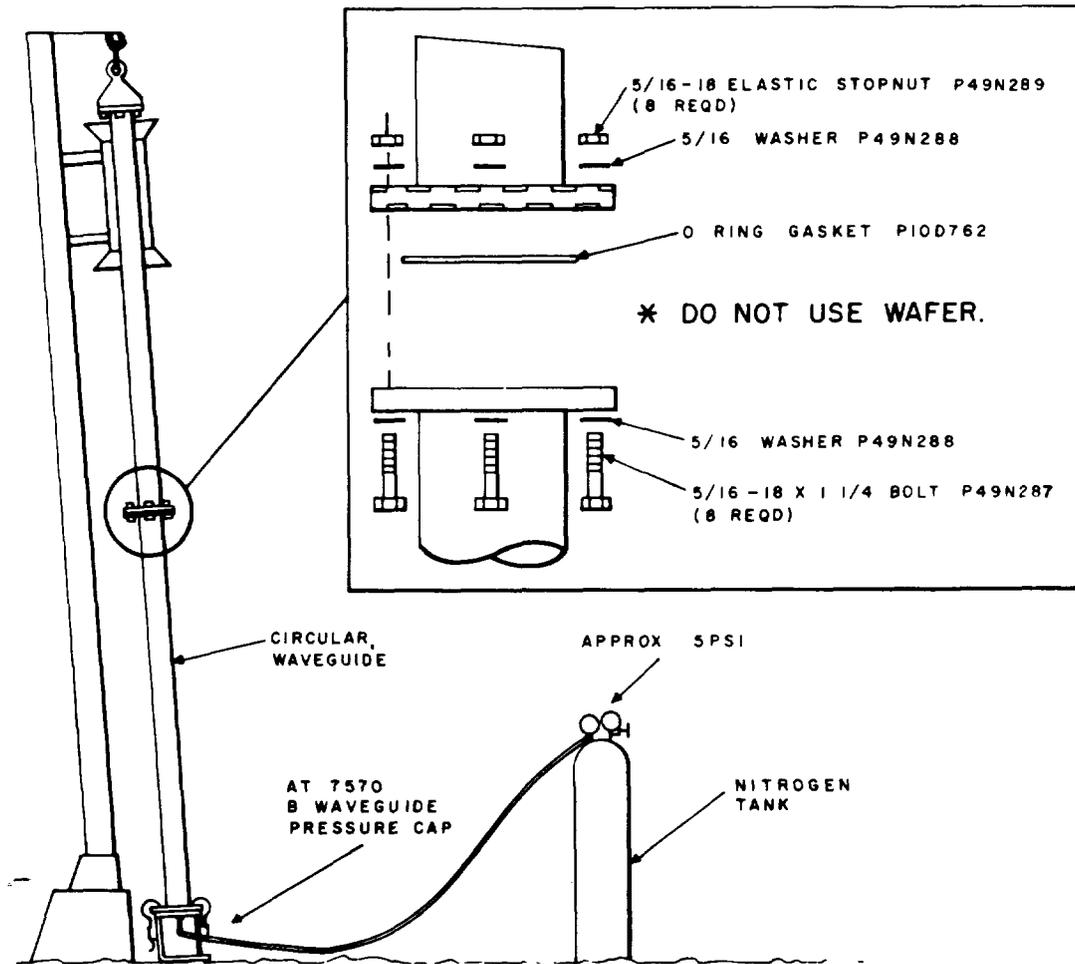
Joining Circular Waveguide Sections—One Flange With Integral Gasket Groove
